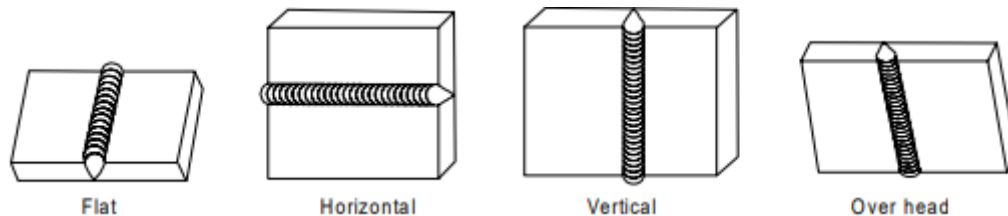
Shows Kind of Welding Positions(wordpress.com)
